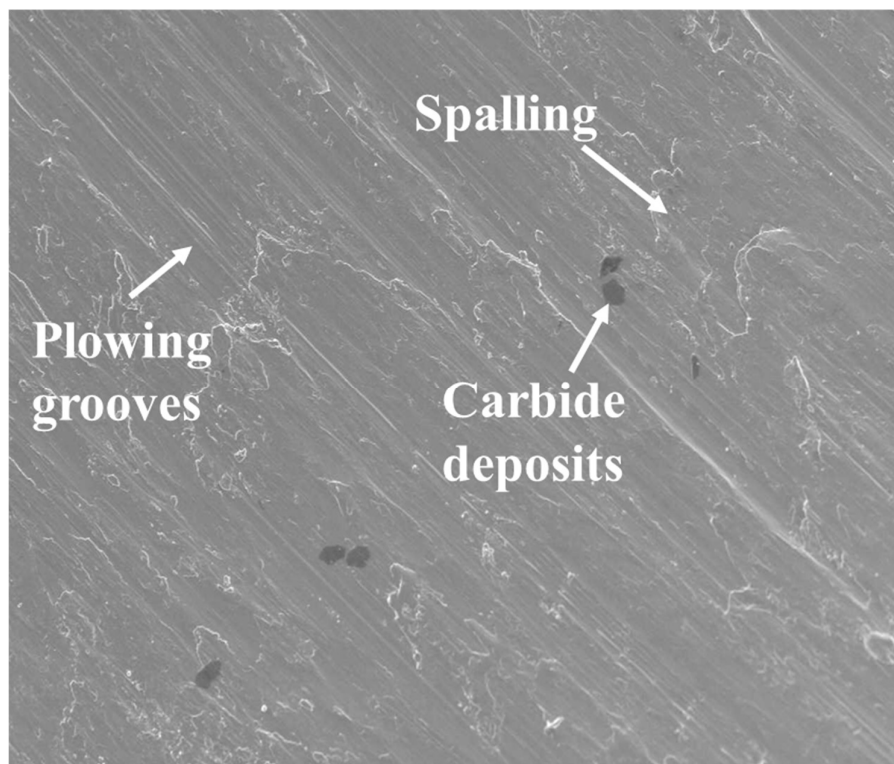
SEM image of Inconel 718 specimen at 700 rpm drilled hole surface using LN₂ as coolant
